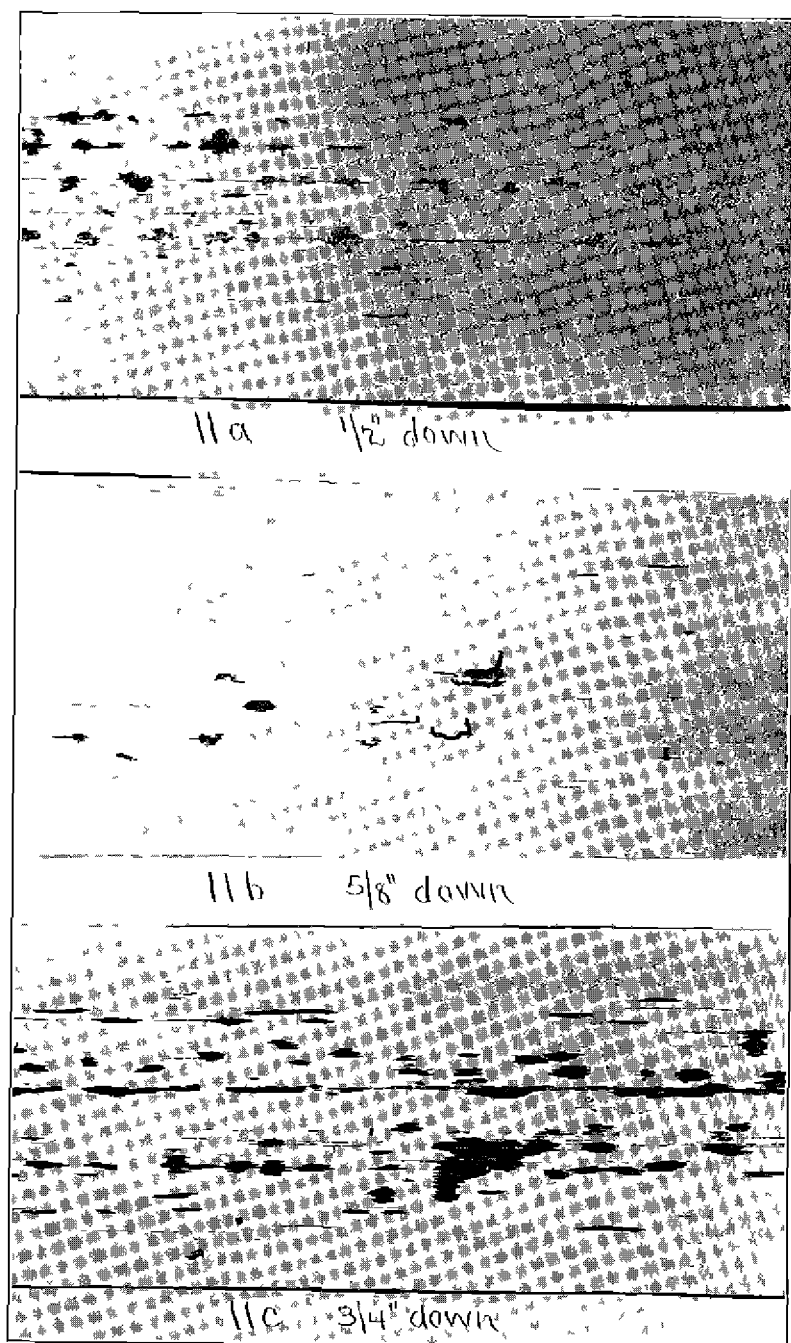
Head of rail 10754C fragment C, planed off in successive stages—surface pickled at each stage
